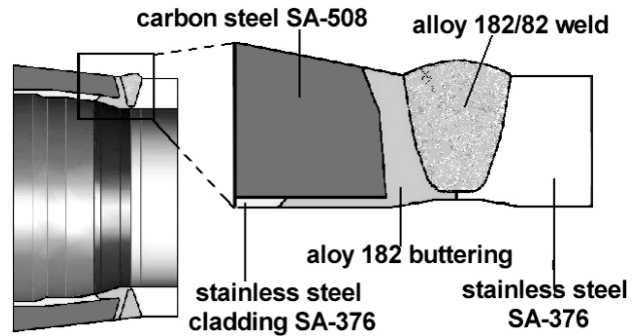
Nozzle-to-pipe dissimilar-metal weld
